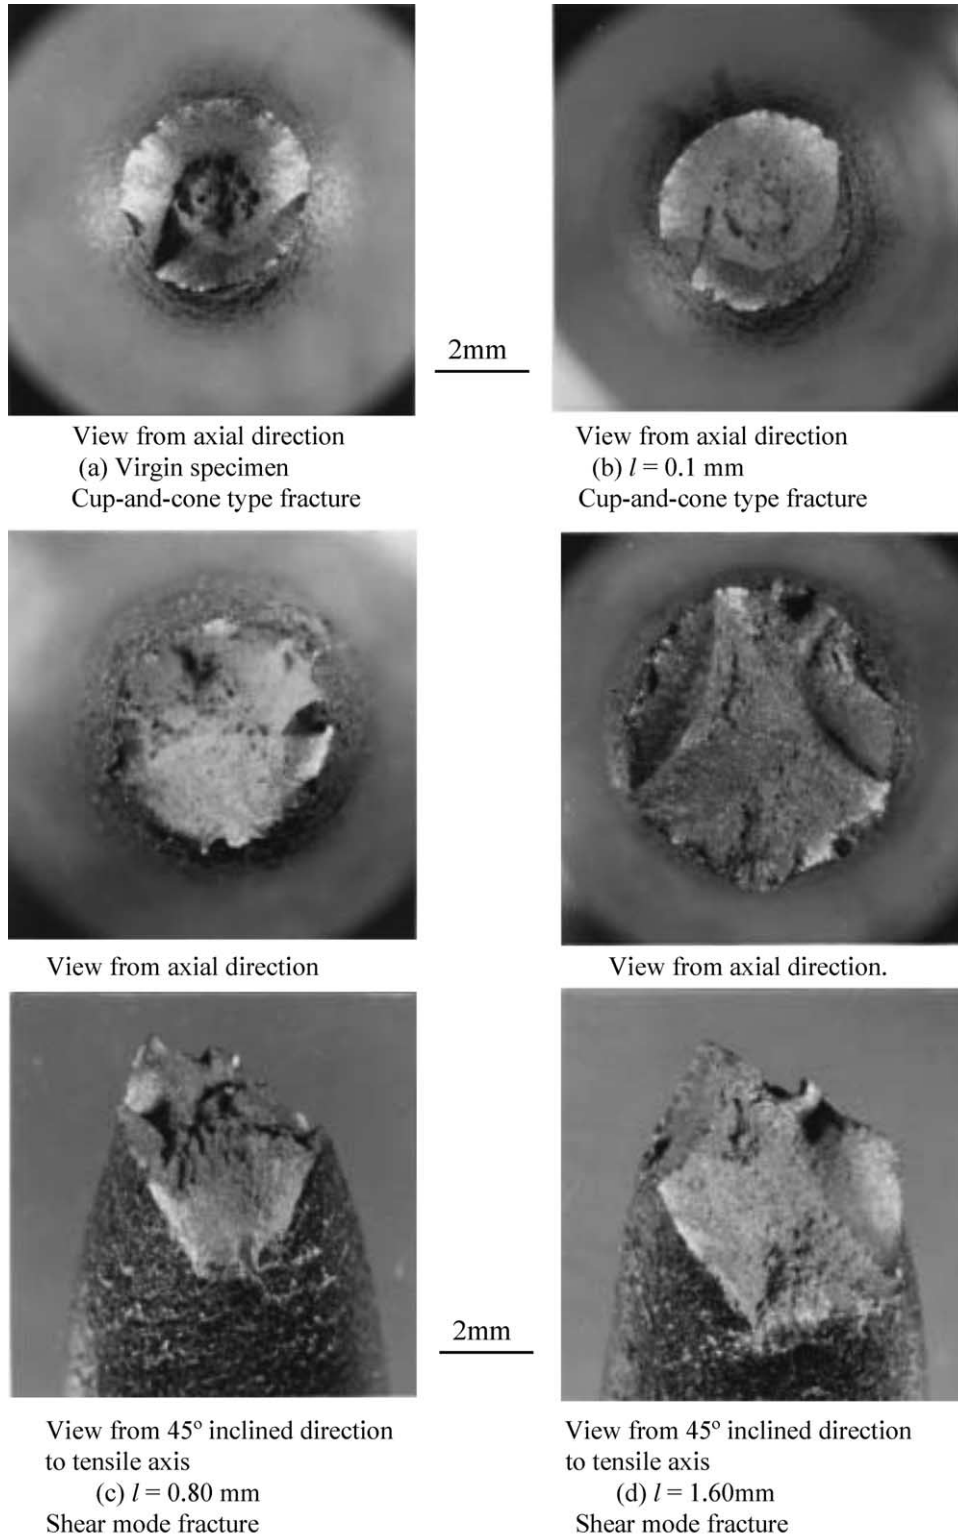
Cup-and-cone fracture and shear mode fracture in plain specimens ( $\Delta\epsilon_p = 0.0254$ ).
